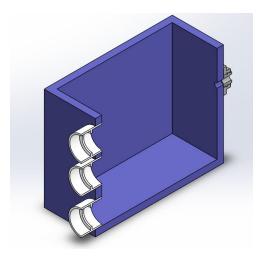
Mechanical Design Version 4 Tank with 2" Couplings and Bearing.
